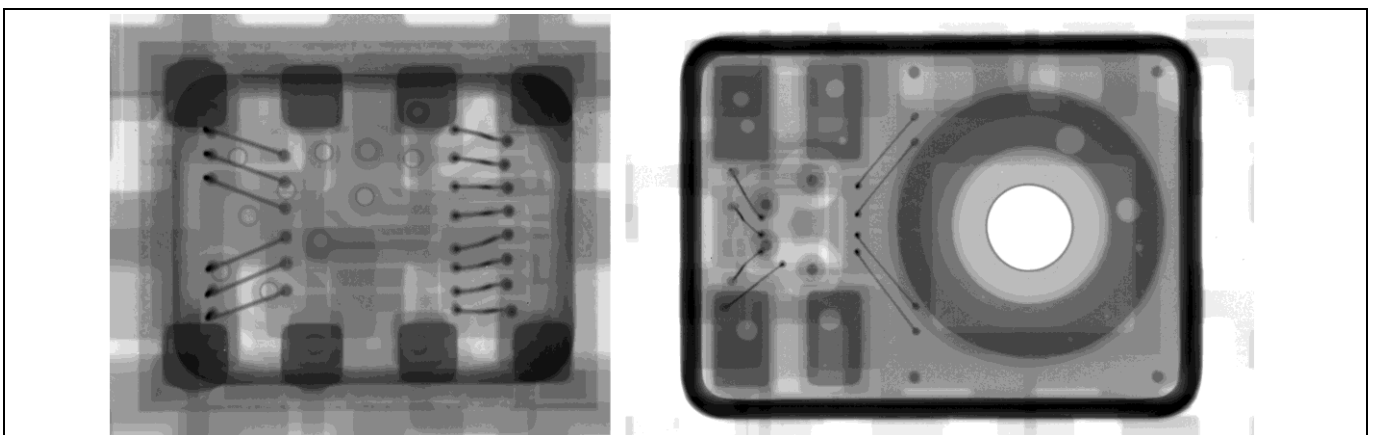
Examples of properly soldered sensor components inspected by X-ray.
